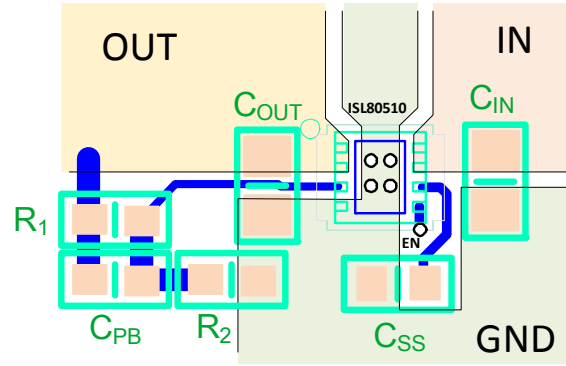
EXAMPLE FOR PCB LAYOUT
